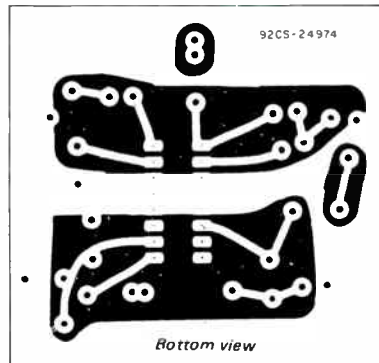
Printed-circuit board (actual size) containing the test circuit, shown in Fig. 3, for the CA3131EM.
